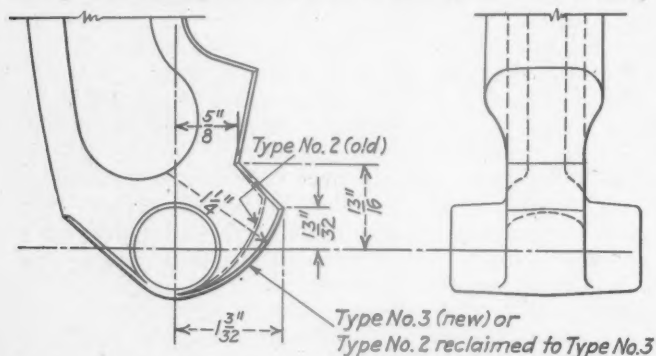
A.A.R. Type D coupler top lock lifters, new No. 3 type and reclaimed No. 2 type
